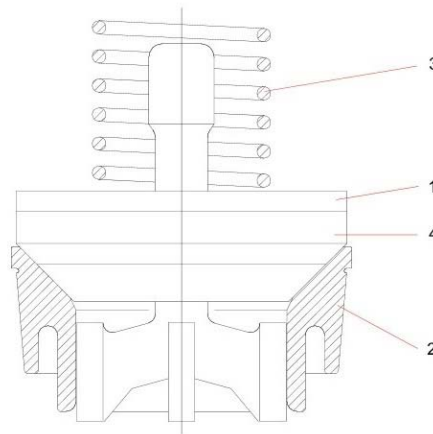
Full open valve: 1. Valve body; 2. Valve seat; 3. Valve spring; 4. Valve insert.
